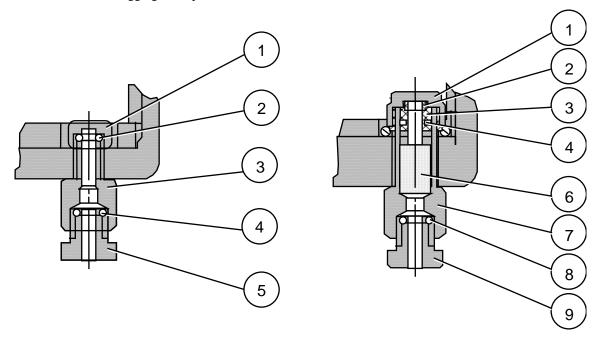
Gas Inlet and Outlet Fitting Parts
